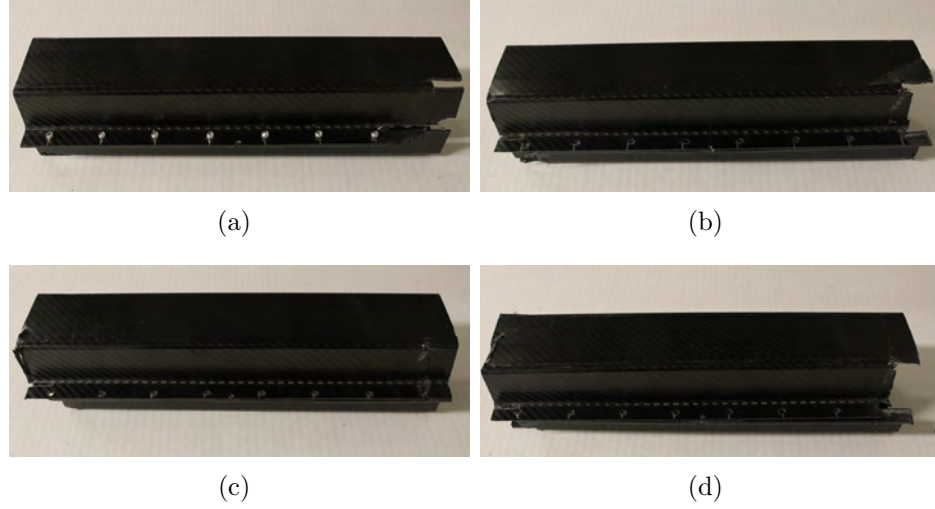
Pictures of each side of the rivet samples after torsion tests: (a) Rivet-t-1; (b) Rivet-t-2; (c) Rivet-t-3; (d) Rivet-t-4.
